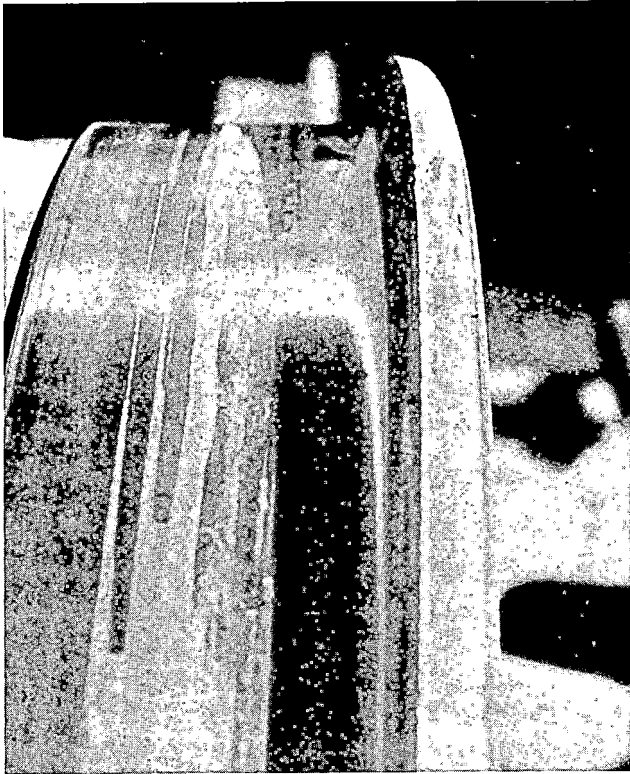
TYPICAL WHEEL WEAR PATTERN SHOWING EXCESSIVE FLANGE WEAR.
